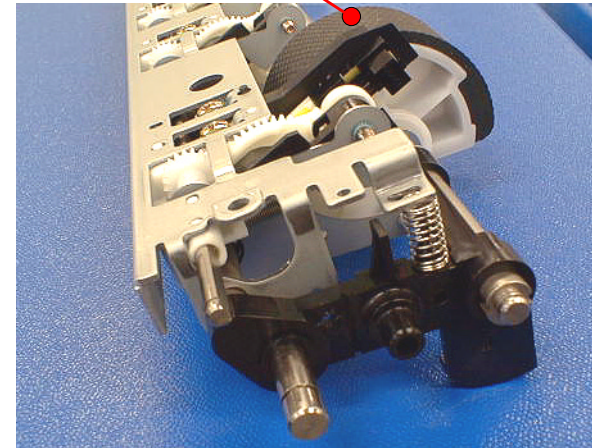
Angle of "Roller, Paper Feed" Before installing "Driven Gear"
